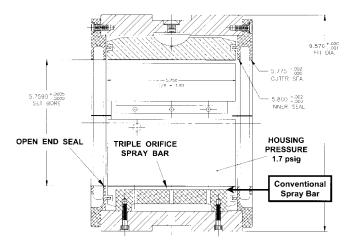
16,000 HP Pinion Bearing, Evacuated Housing with Directed Lubrication.
